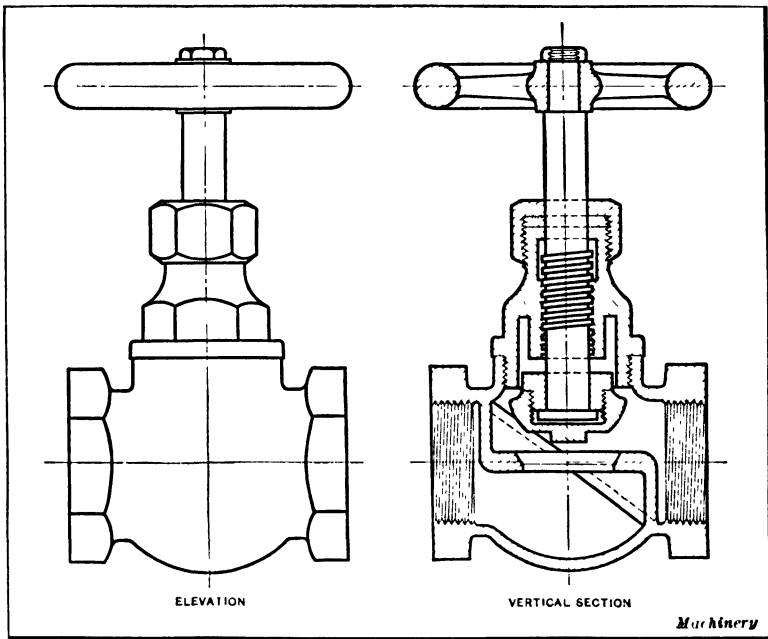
Outline Drawing and Sectional View of a Globe Valve
